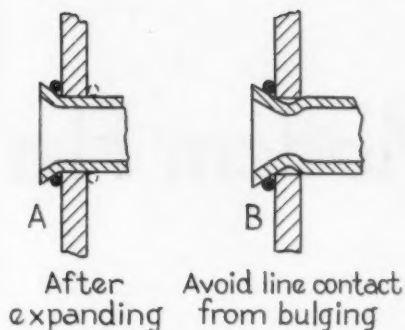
Expanding tubes into tube sheets can sometimes be employed to advantage.
